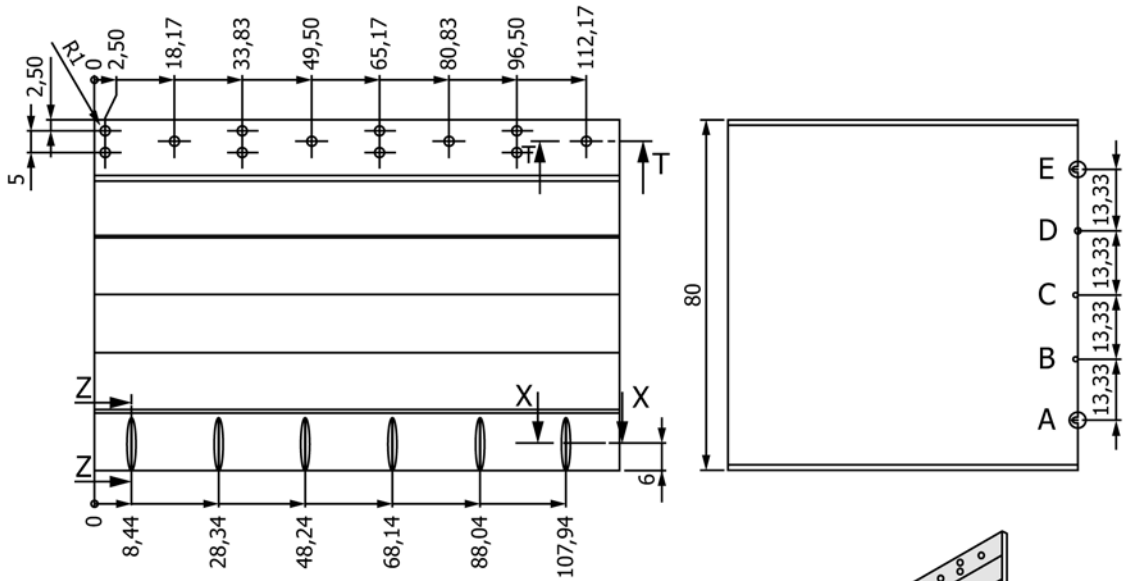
Design of the Milling Cutter for the Five Grooves
